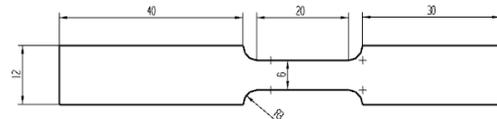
Design dimensions and molding parts of sample parts for trial processing
